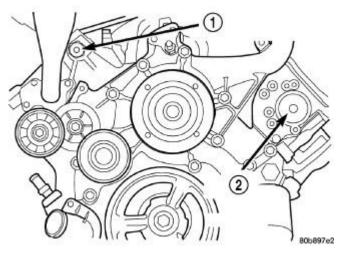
Cylinder Head Access Plugs Courtesy of CHRYSLER LLC
